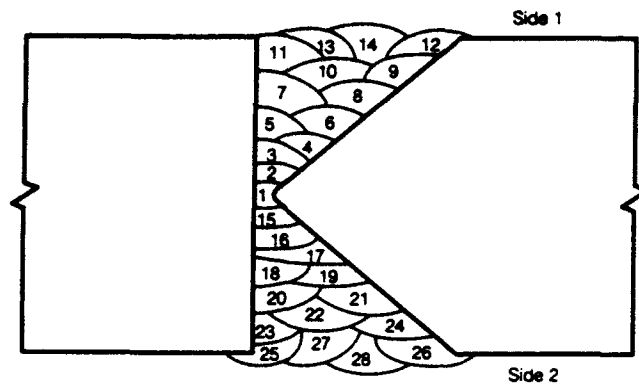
Weld sequence and number of passes [4] for BIS 812 EMA K-preparation weld.
